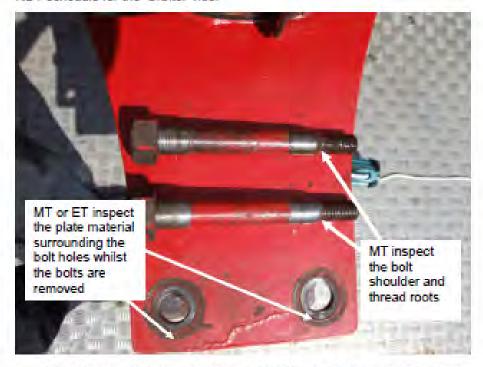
View looking down on the seat attachment arm with the seat assembly removed.
